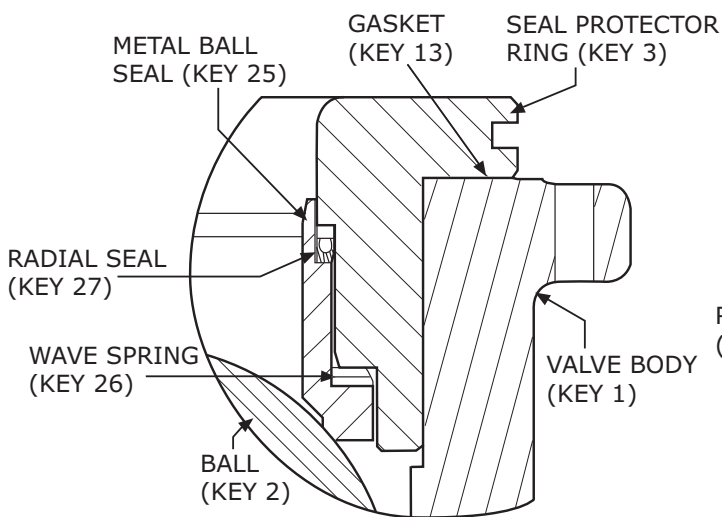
Ball Seal Assembly Diagrams for Valve Sizes 2 Through 12 Inch
